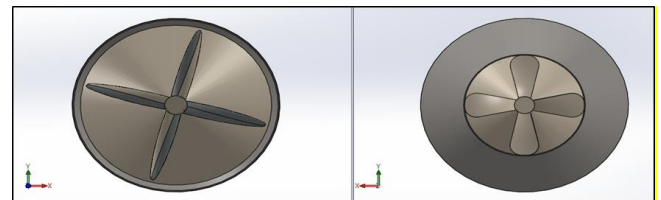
Sketch and Projection of Compressive Body by Revolved Base
